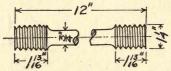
TENSION SPECIMEN FOR CAST ZINC.
